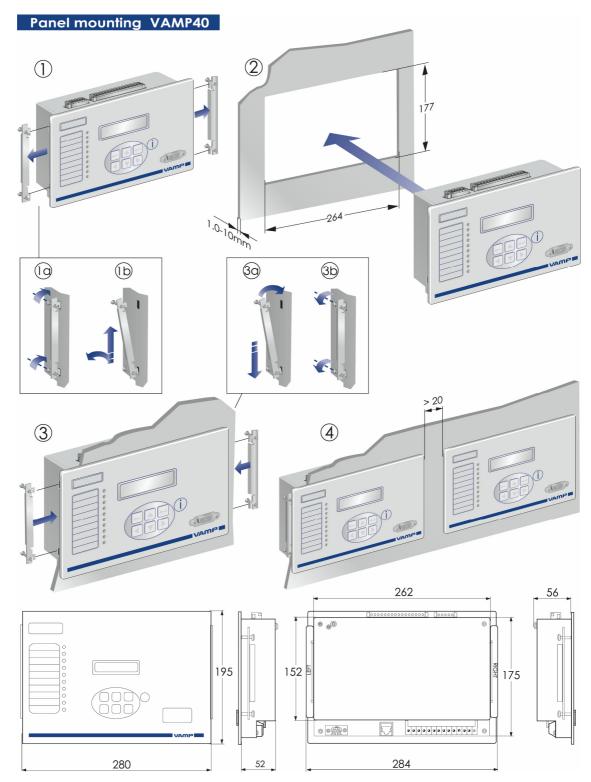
panel cut-out dimensions and Dimensional drawing
